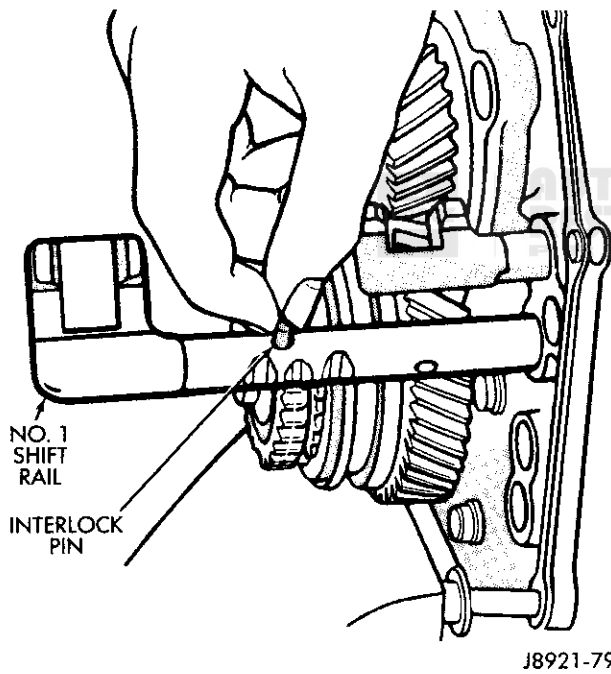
Installing Interlock Pin In No. 1 Shift Rail
